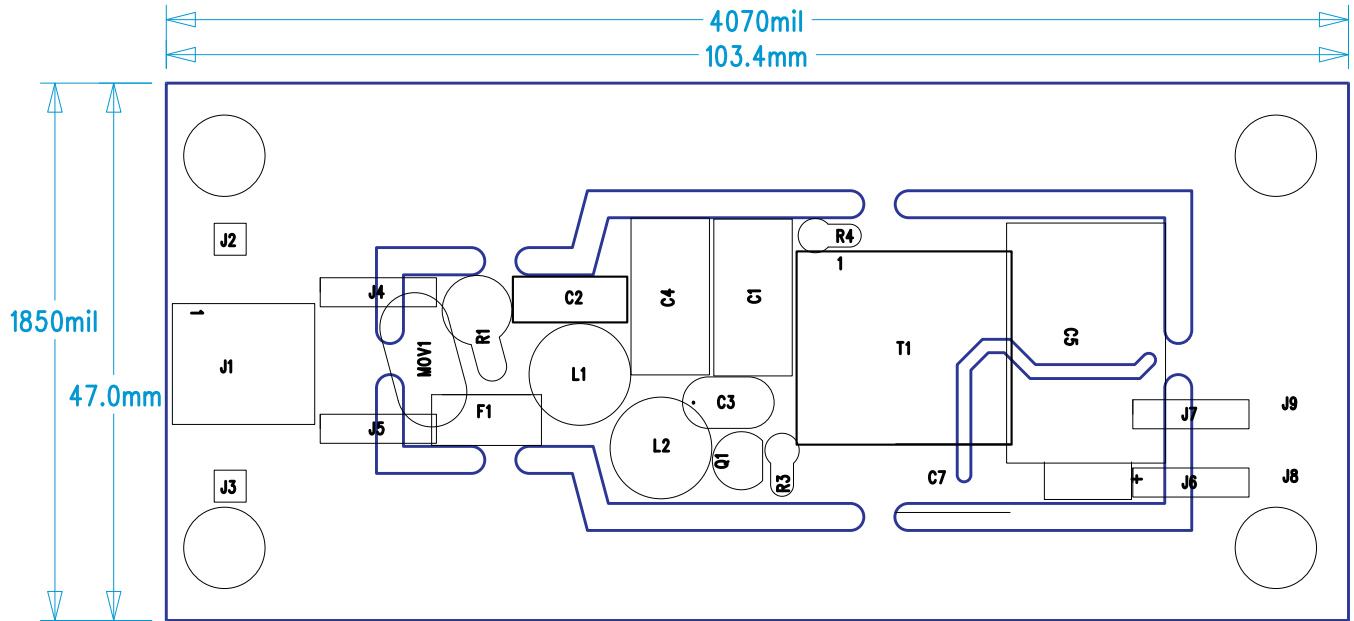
LM3447-A19-120VEVM Top Assembly Drawing (top view)
